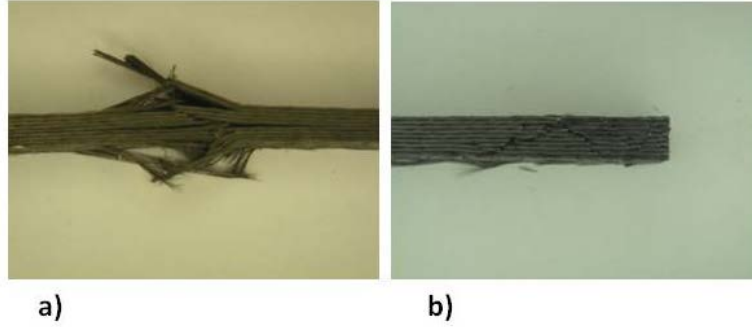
Failure modes of cross-ply compression specimens. a) axial splitting b) end failure.
